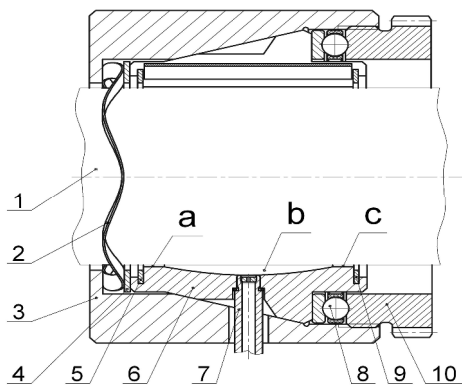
Adjustable journal segmental hydrostatic bearing: 1 – spindle; 2 - wave spring; 3 - housing; 4 - washer; 5, 9 - rings; 6 - segment; 7 - fitting; 8 - thrust ball bearings, 10 - tensioning nut
